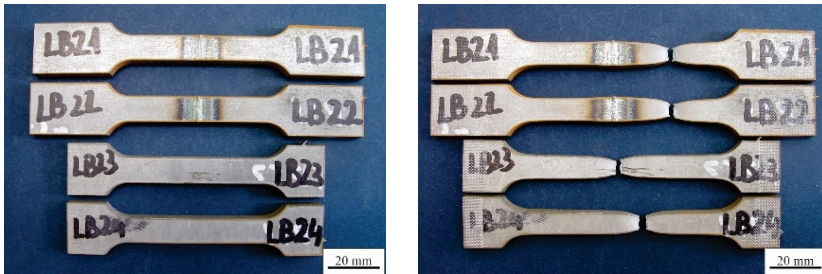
Tensile test specimens LB-2, welded without shielding gas and base metal: (a) before and (b) after the tensile test
